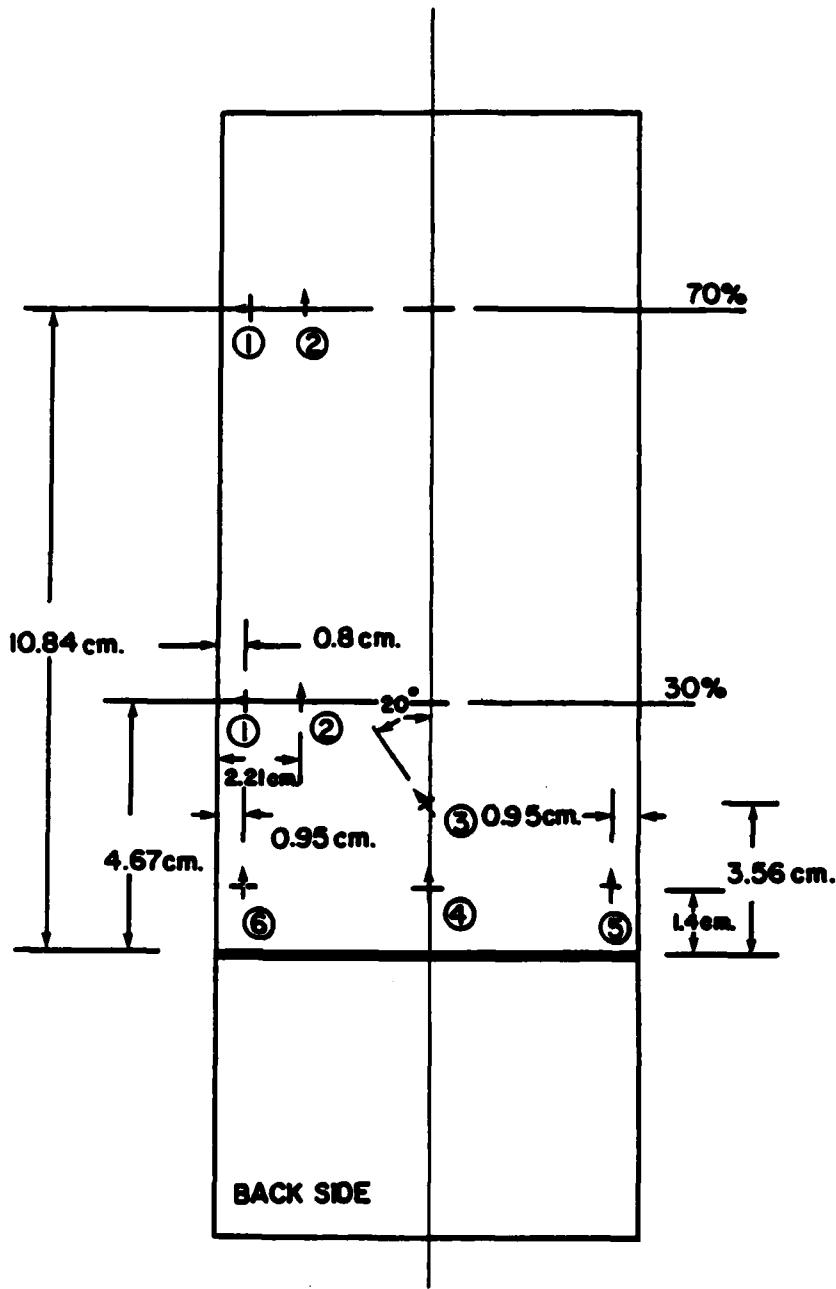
A. Strain Gage Locations for Group 5 Structural Element Test Specimens.
